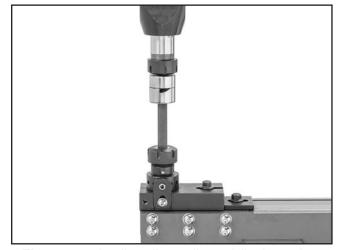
Anvil tooling adjusted flush against hammer tooling to dial in alignment (louver dies shown).
